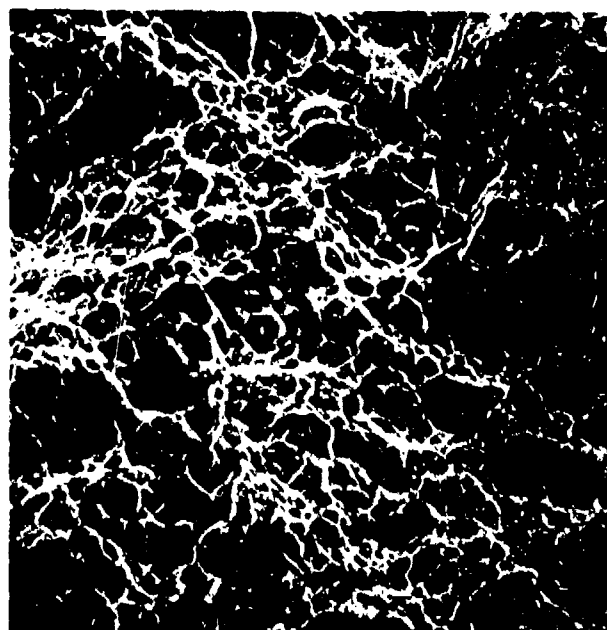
Fracture surface of hydrogen-embrittled A-514 weld specimen away from "fisheye," 1500x.
